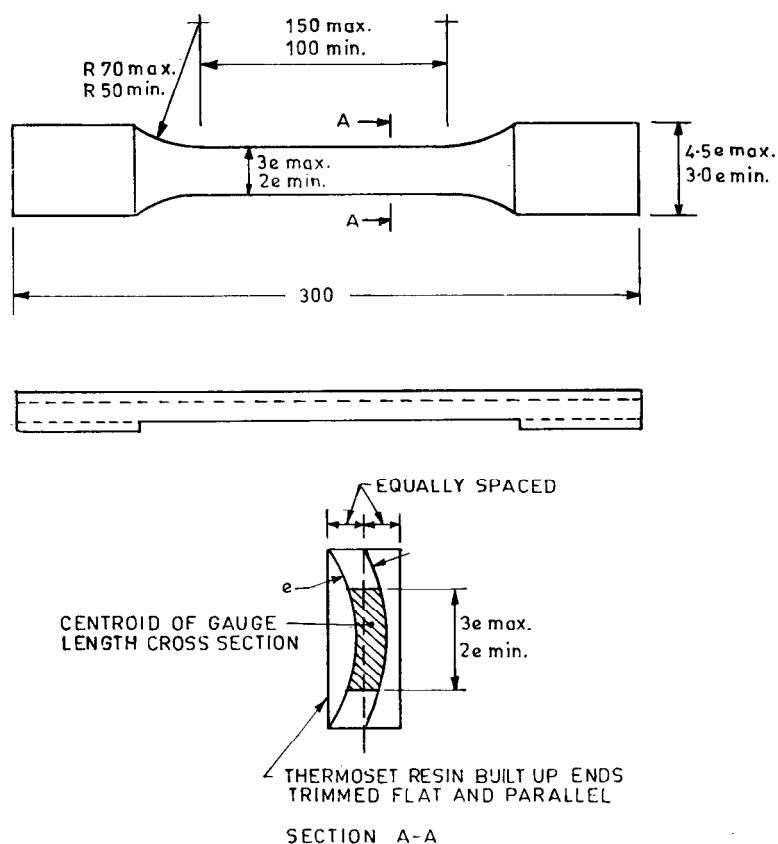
STRIP TEST PIECES FOR DETERMINATION OF LONGITUDINAL TENSILE STRENGTH
